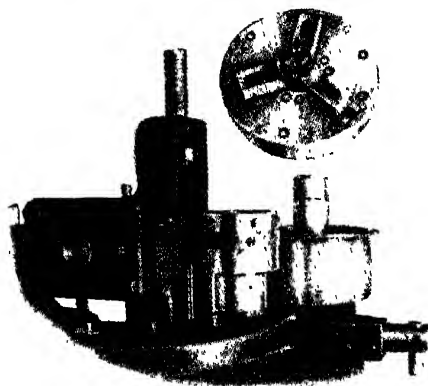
BACK FACING ATTACHMENT FOR CAPSTAN LATHE
